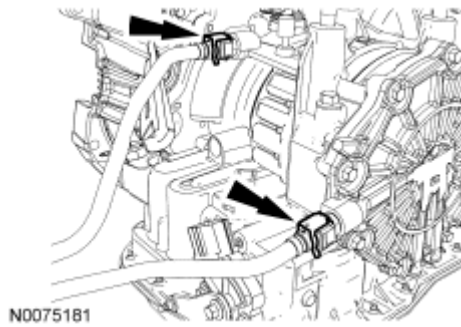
Locating Transmission Fluid Cooler Tube Secondary Latches
